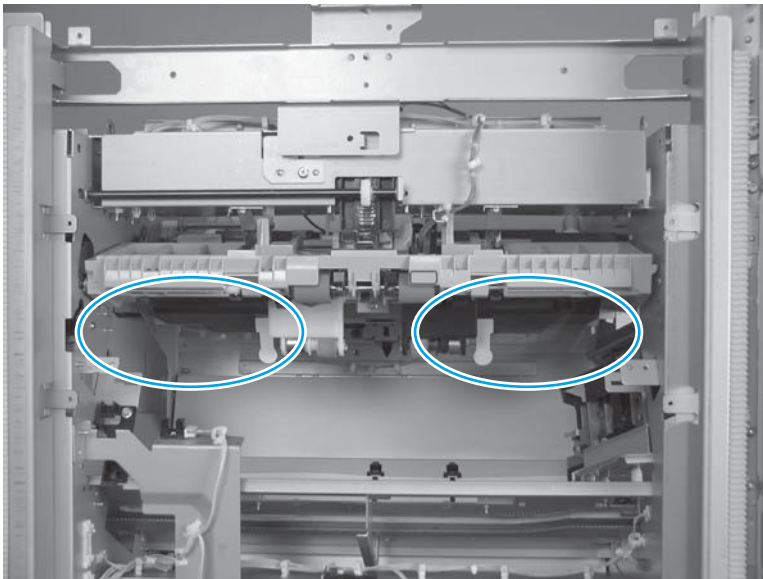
Reinstall the operation tray assembly (2 of 5)
